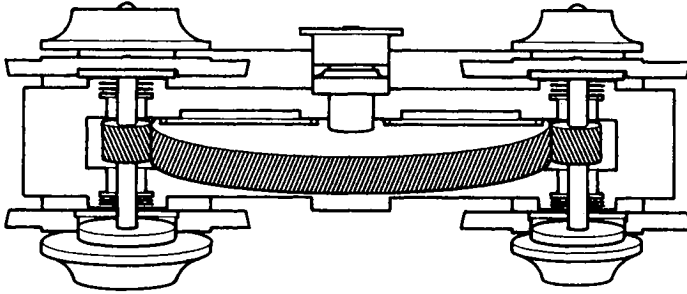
The input full gear of atypical integral-gear unit runs at motor speed. The low-speed pinion drives the first-stage impeller (upper right) and the second-stage impeller (lower right). The high-speed pinion drives the third-stage impeller (upper left) and the fourth-stage impeller at higher speed to match the reduced volume flow due to pressure increase and cooling.
